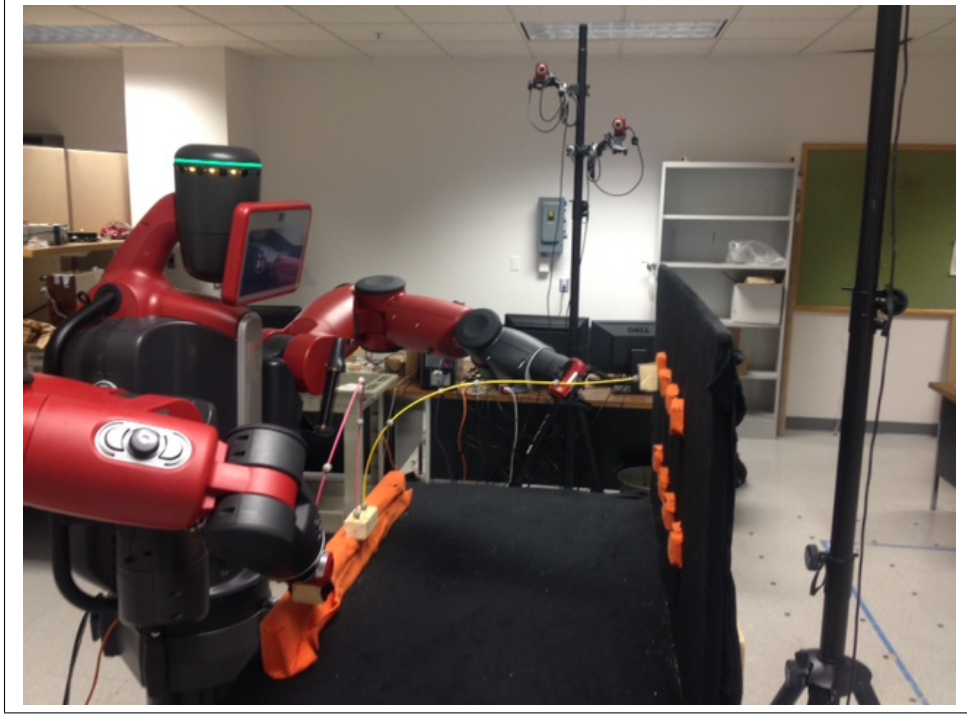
Baxter performing manipulation with a cable assembly prototype. This prototype contains two separate wires that are attached at one end. The Baxter robot is attaching the other end of one of the wires to a connector of a table surface.
